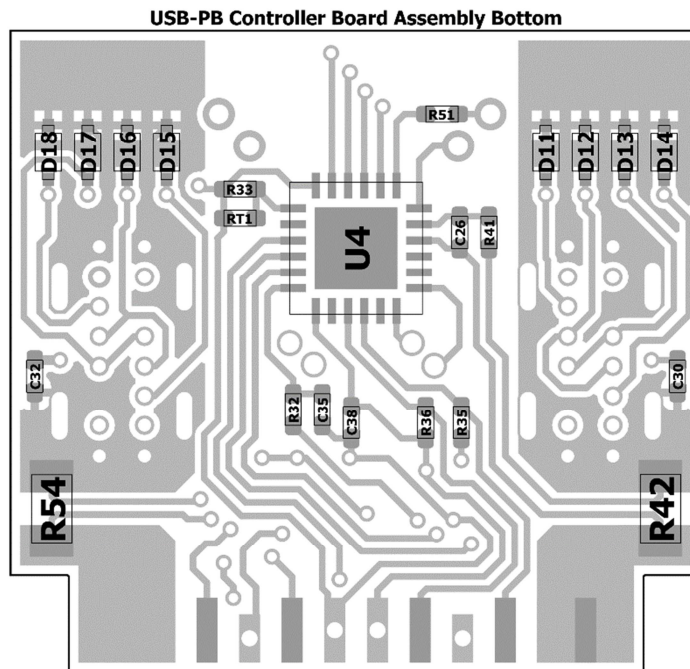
DER-916 Main Board PCB Rev C Assembly Bottom.
